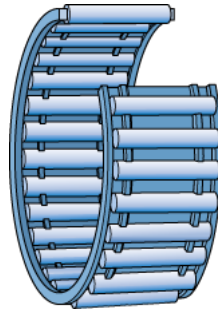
Single Row Needle Roller and Cage Assembly. [11].
